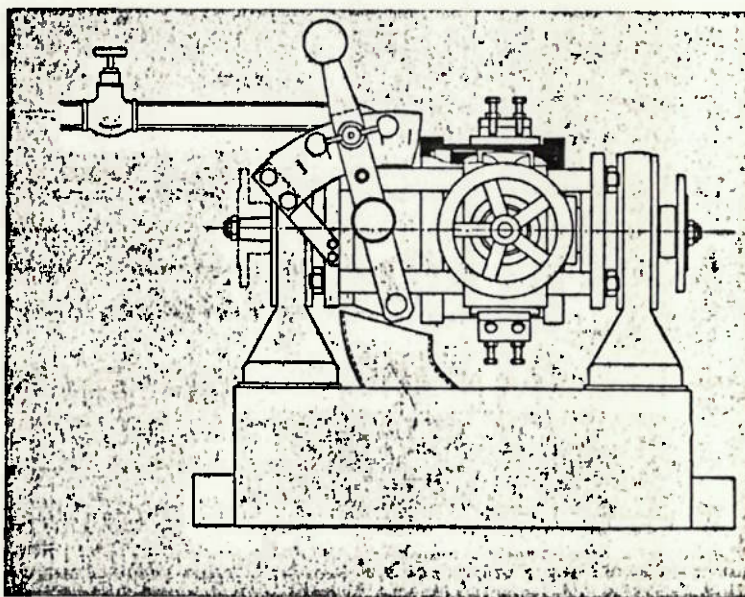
Hydraulic Dynamometer with prony type friction brake
